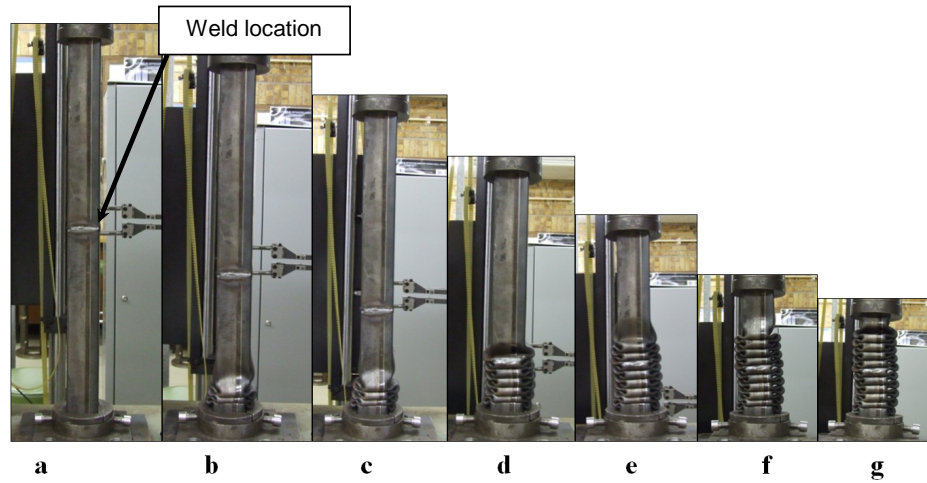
Progressive buckling of welded tubes specimen 300w300.
